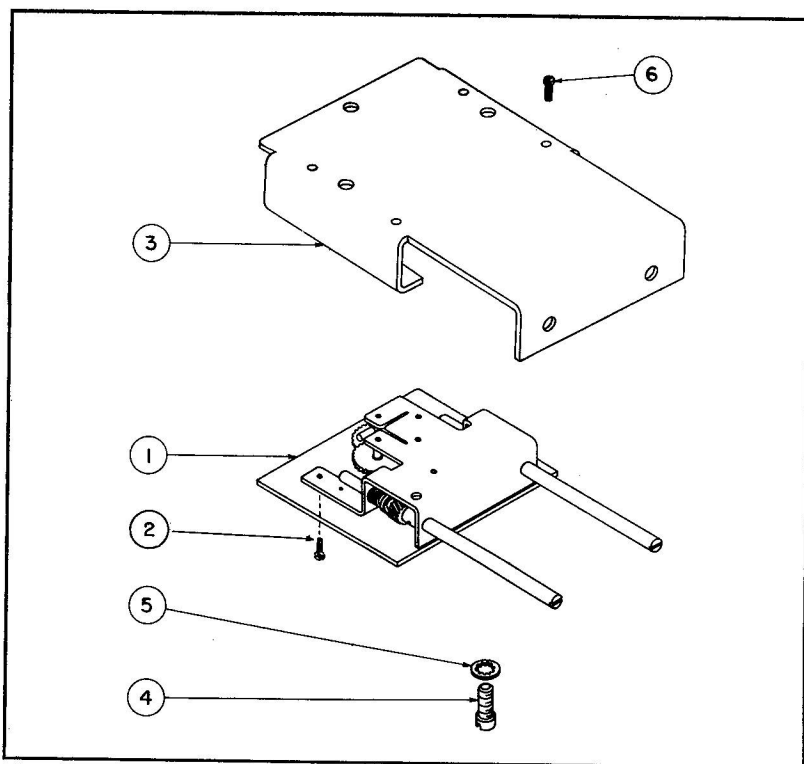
Exploded View - Compass - Compensator Assembly and Attaching Parts -
